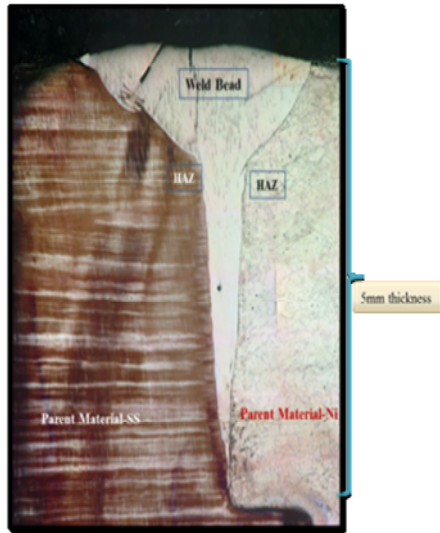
microscopic view of SS-Ni weld specimen
